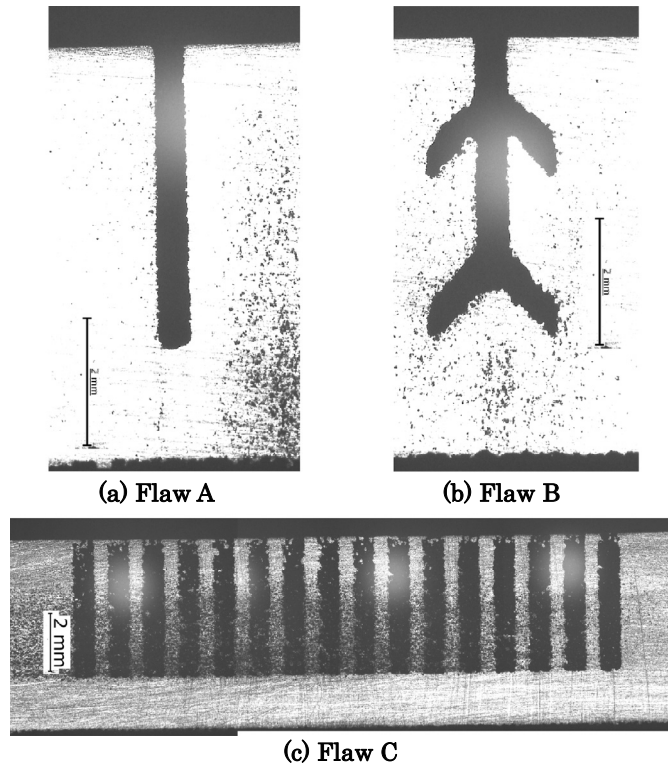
Cross-sectional profiles of the flaws. The three flaws had a depth of 4.9 mm.
